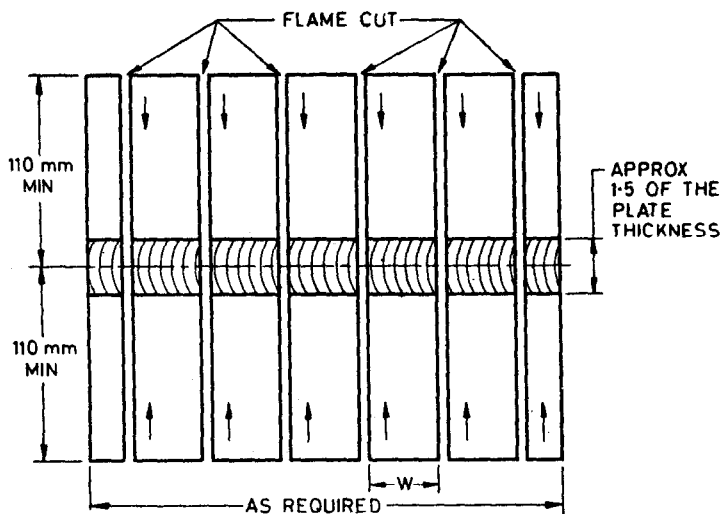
TEST PIECE FOR THE PREPARATION OF STRAIGHT TENSILE AND BEND TEST SPECIMENS
